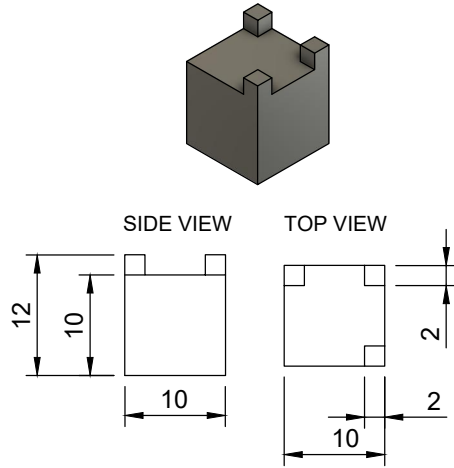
The part design and dimensions (mm unit) examined in this work.
